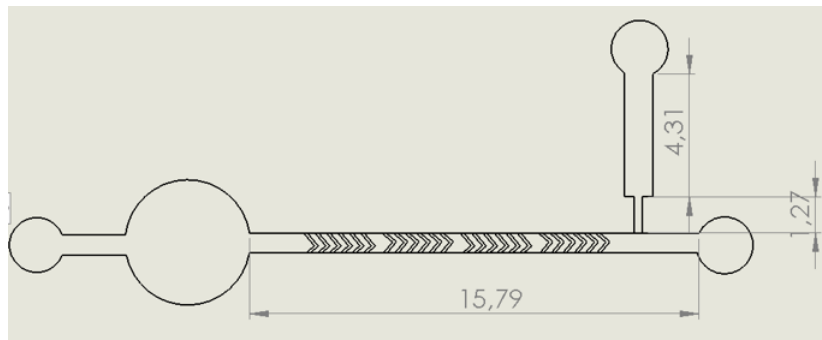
Drawing in SolidWorks of Staggered Herringbone Mixer
